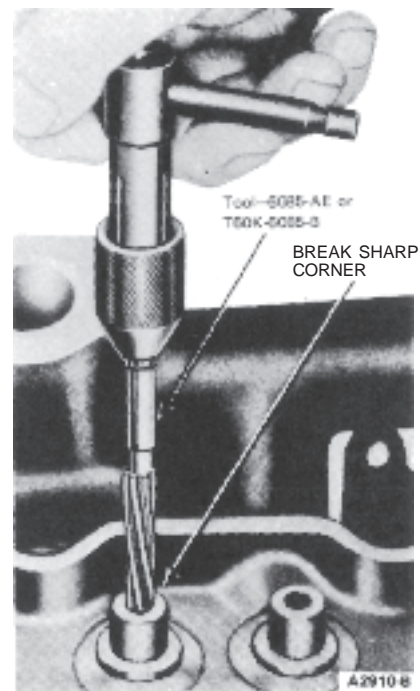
Reaming Valve Guides-6 Cylinder Shown
